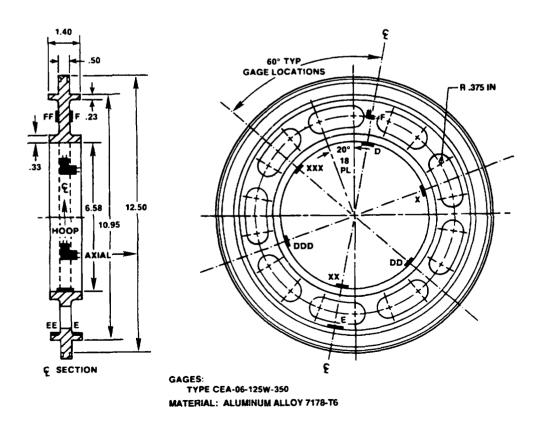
Aluminum ring stiffener DWG 0124008; location of gages.
